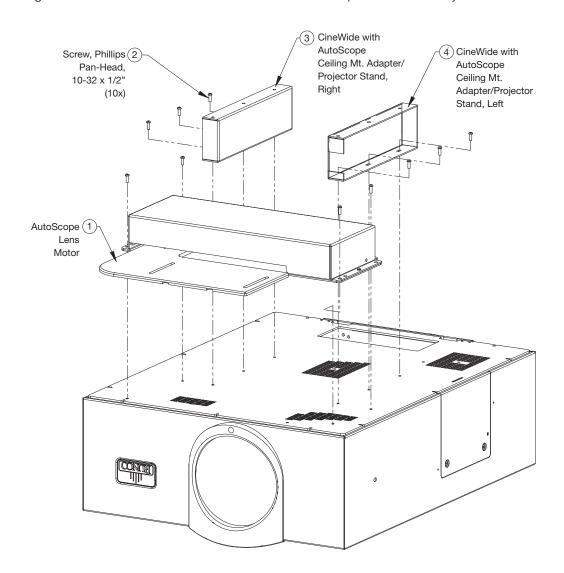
VX-6000d/CineWide with AutoScope Motor Assembly – Exploded View
